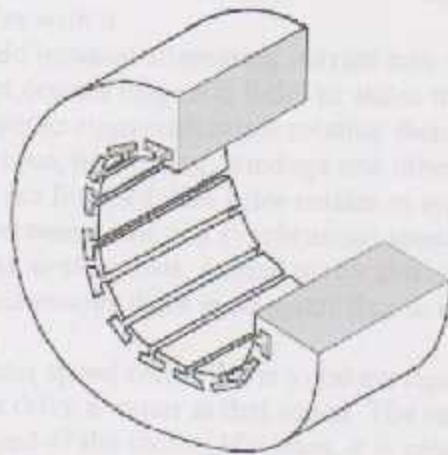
Stator Frame Showing Slots for Windings (9)
